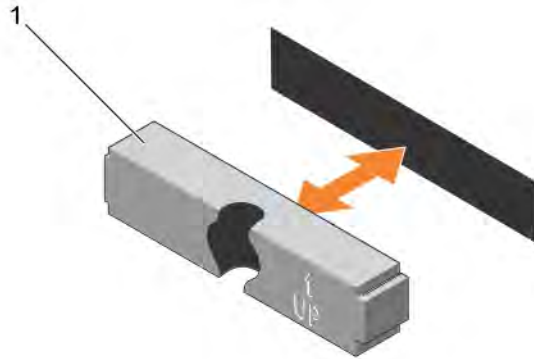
Removing and installing a 2.5 inch hard drive blank (back)
